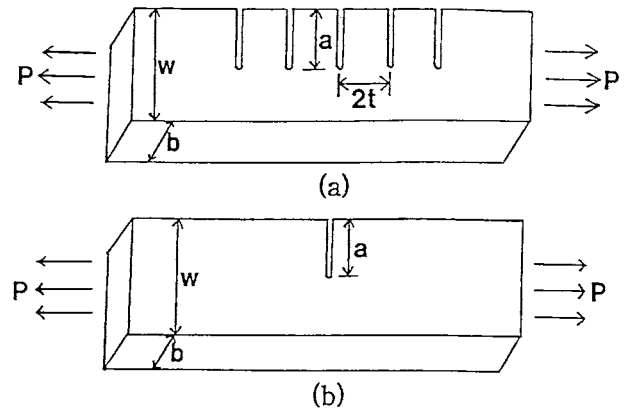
Geometry of specimen: (a) parallel edge crack and (b) single edge crack.
